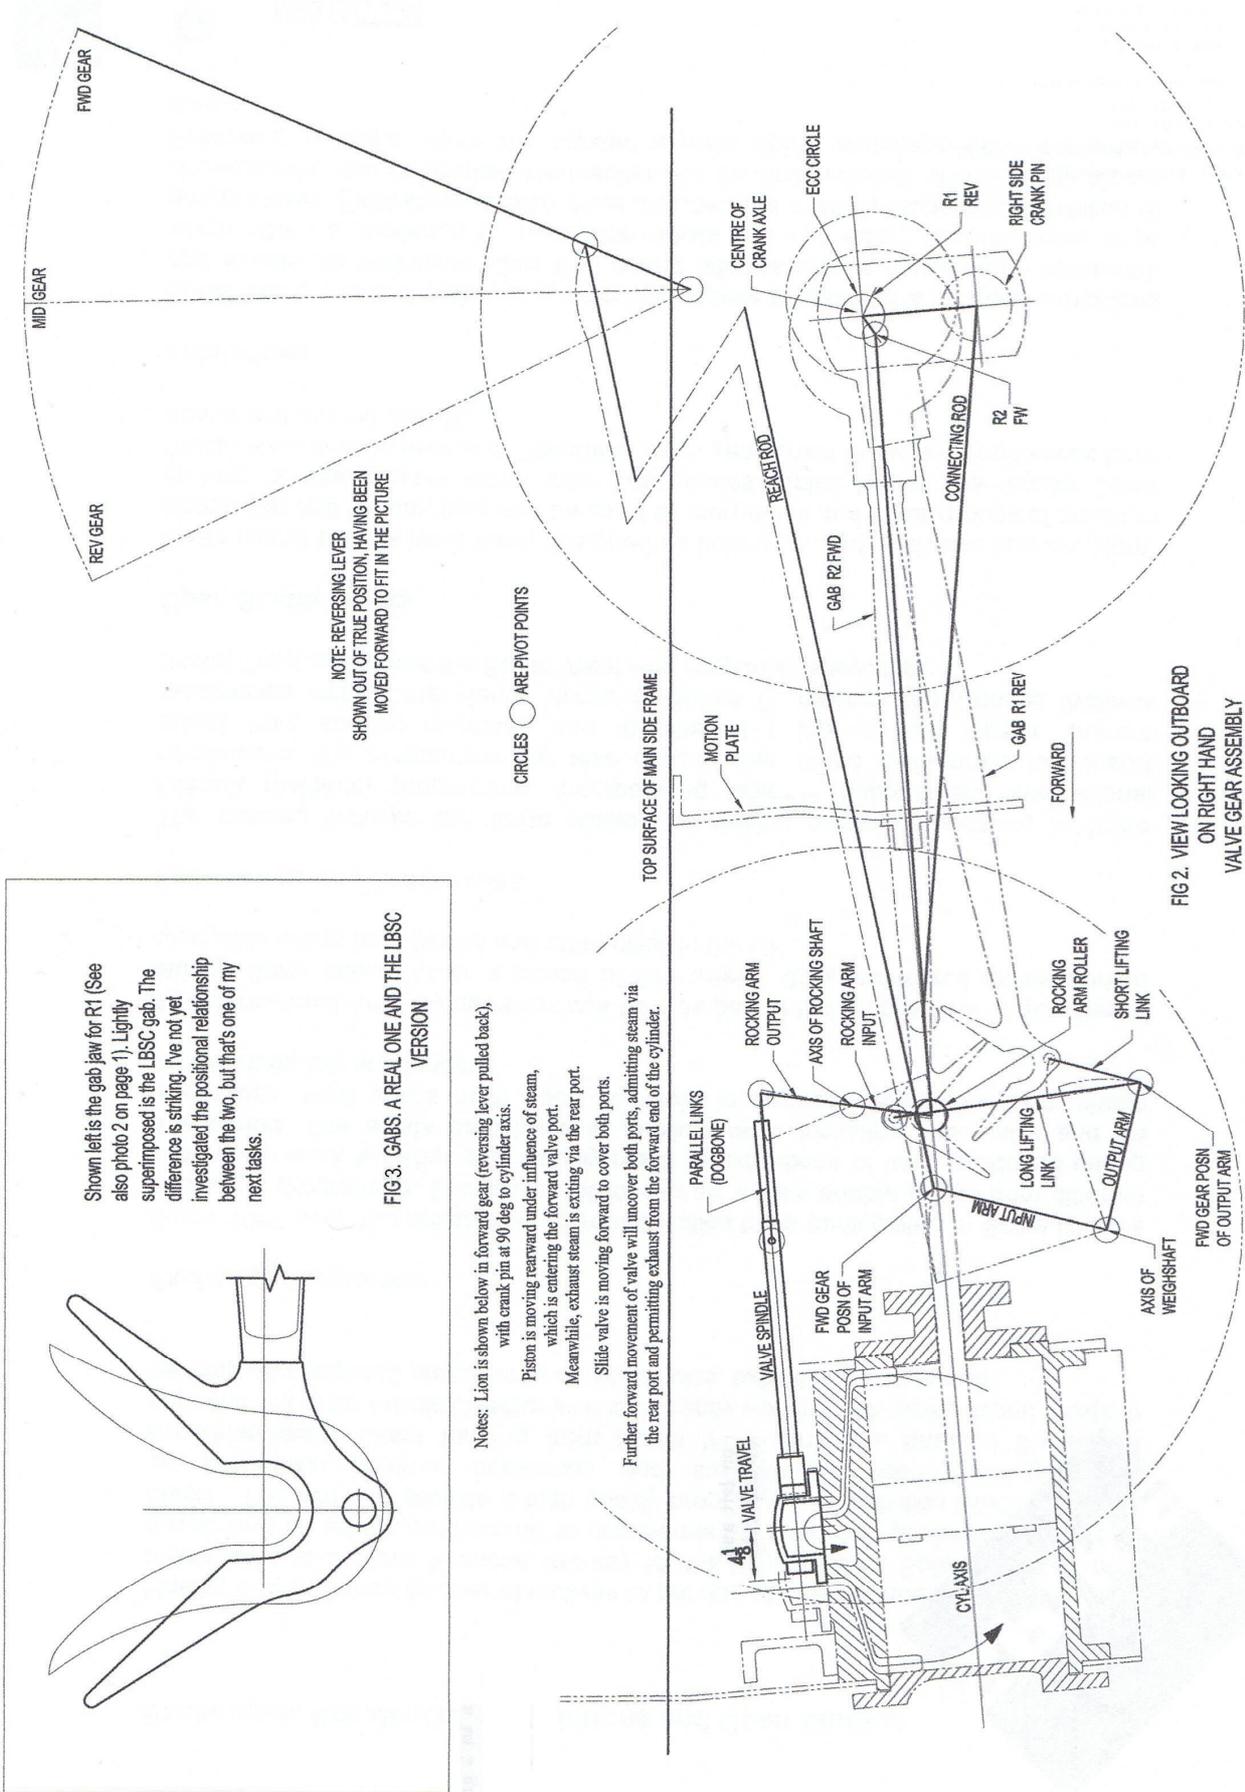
VIEW LOOKING OUTBOARD ON RIGHT HAND VALVE GEAR ASSEMBLY
